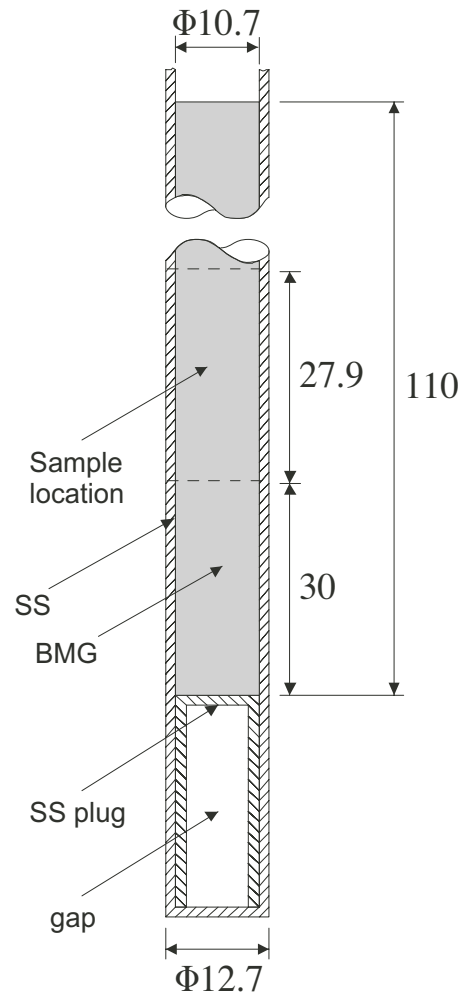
Geometry of the BMG alloy cast in a stainless steel (SS) tube. The actual sample location used in crack compliance measurements is shown between dashed lines. All dimensions are in mm.
